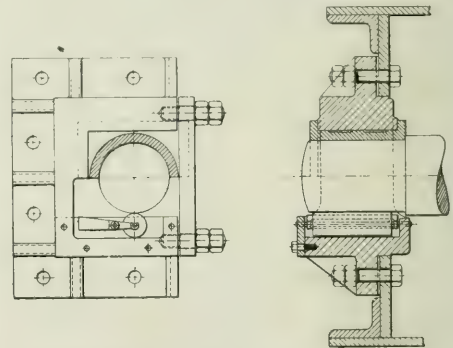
END-TYPE SELF-LUBRICATING AXLE BOX, BY BROADBENT & SONS.
